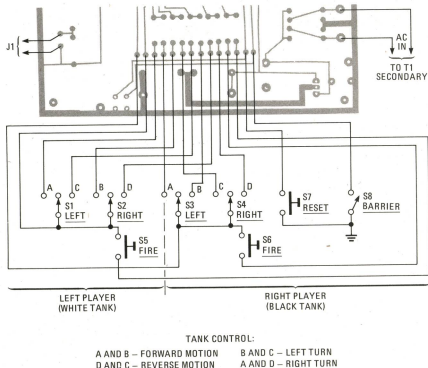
HOW SWITCHES ARE CONNECTED to the game IC on the board. Lower section of the component side of board is shown for reference.
